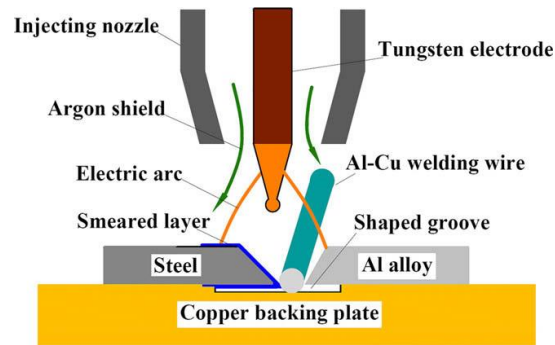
Schematic of aluminum–steel butt TIG welding–brazing.
